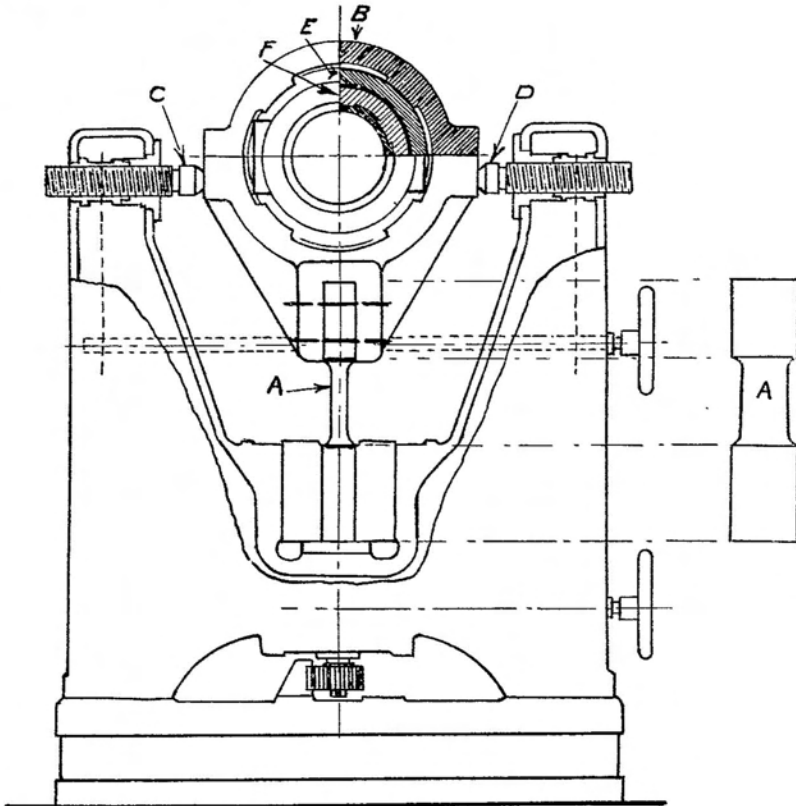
Schenck Machine—Diagram illustrating Leaf Spring at A.
